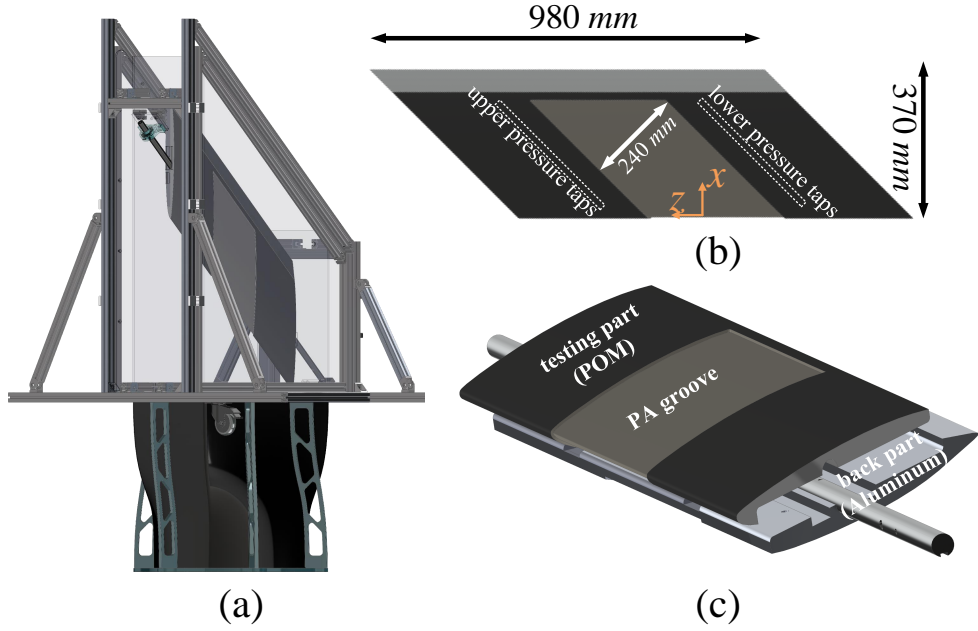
(a) CAD model of $K-M3J$ installed in the test section; (b) Top view of $K-M3J$ (pressure side); (c) Individual parts of the assembly CAD model.
